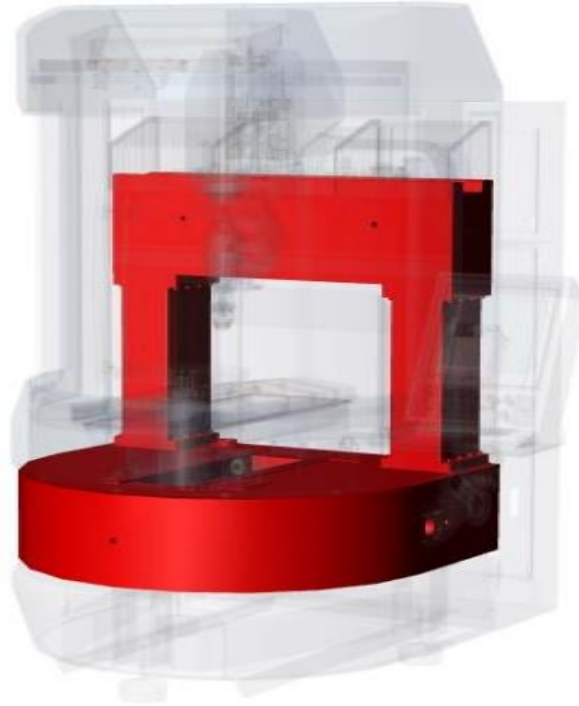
Polymer Granite Base & Welded Steel Frame
